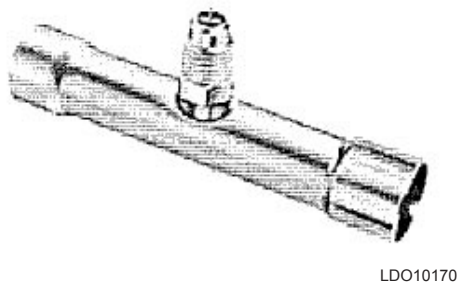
SCHRADER VALVE (ASSEMBLED)
